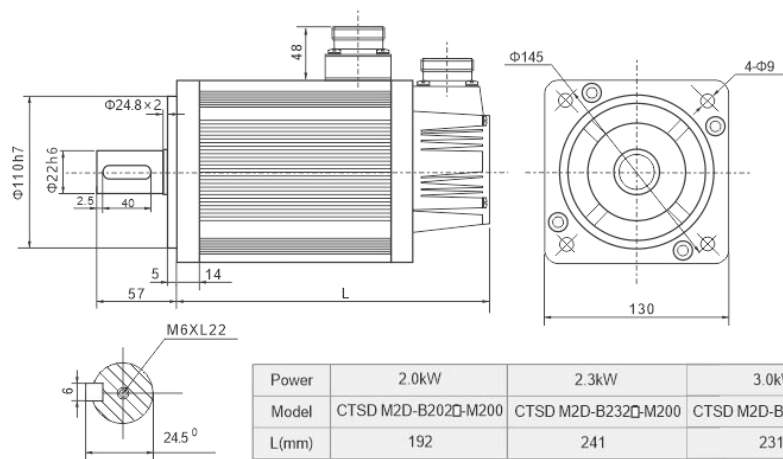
Motor dimension of 2.0kW/2.3kW/3.0kW
